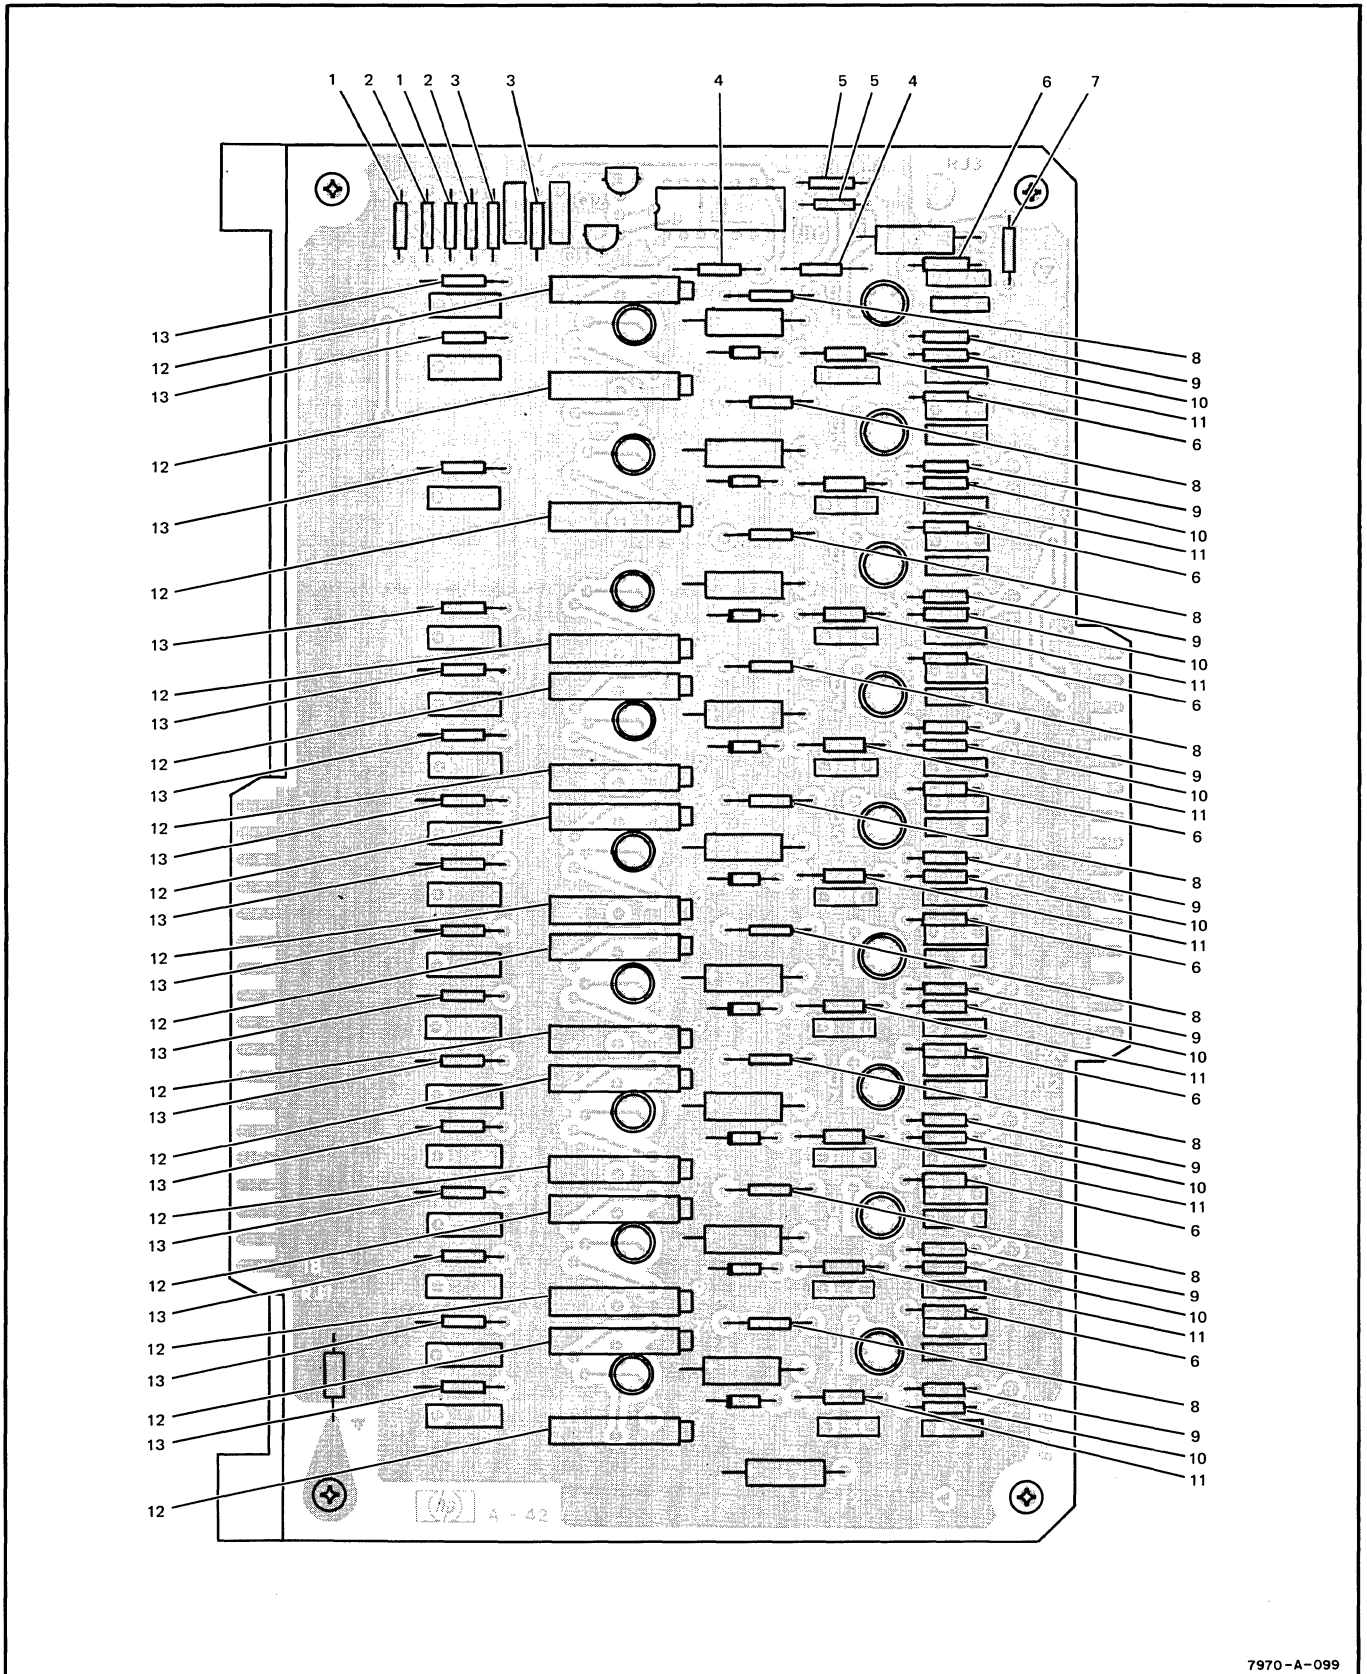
Read/Read Preamp PC Assembly A15 (Sheet 1 of 2)
